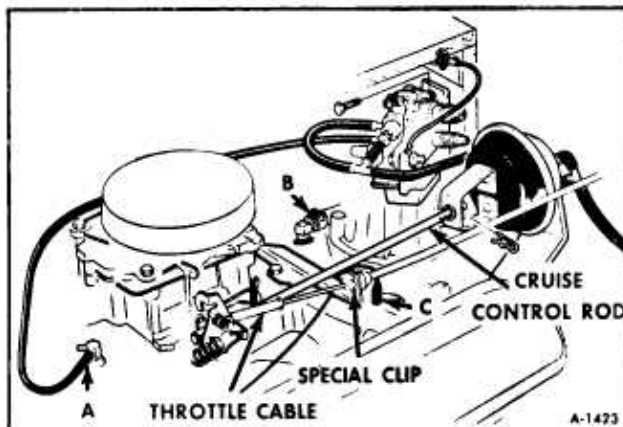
Location for Disconnecting Vacuum Hoses and Throttle Cable
